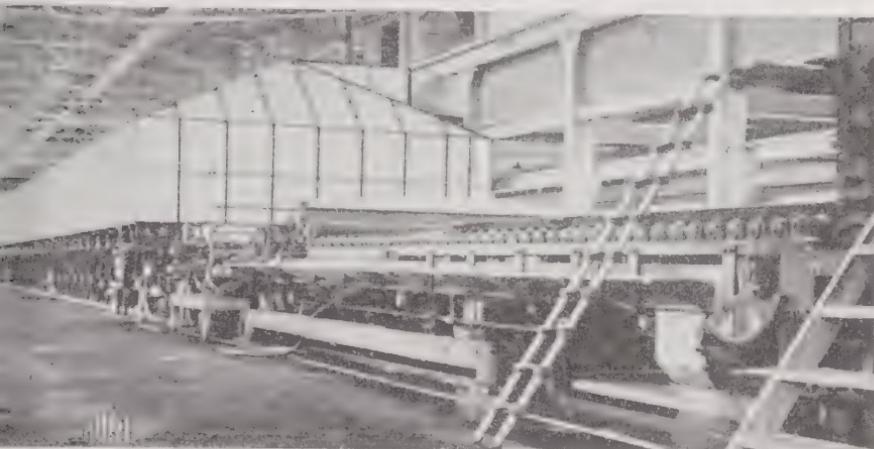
Fourdrinier paper machine with sheet-forming section in immediate foreground. (Courtesy of Beloit Iron Works.)
